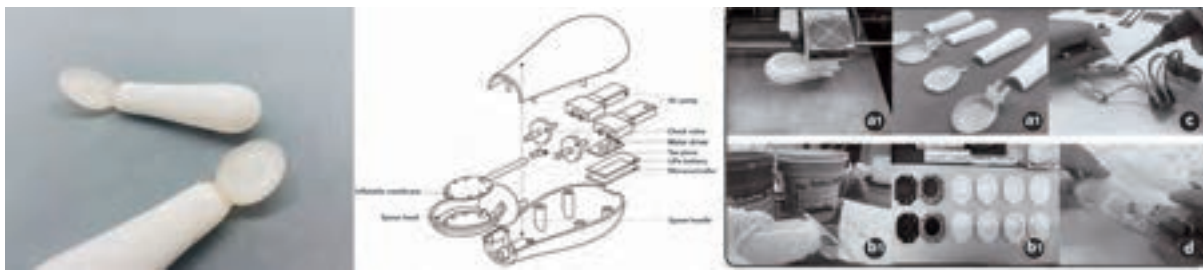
The fabrication and final prototype of *SSpoon* includes (a) 3D printing; (b) multiple moulding and casting; (c) wire soldering; (d) assemble. Main body part of the *SSpoon* was 3D printed using dental SG resin for food safety.
